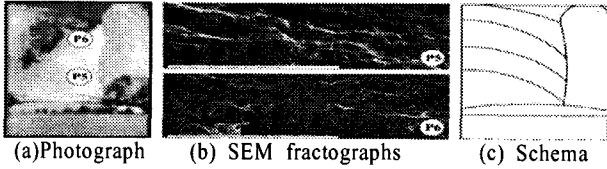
Fatigue fracture surface in comp.-comp. type
